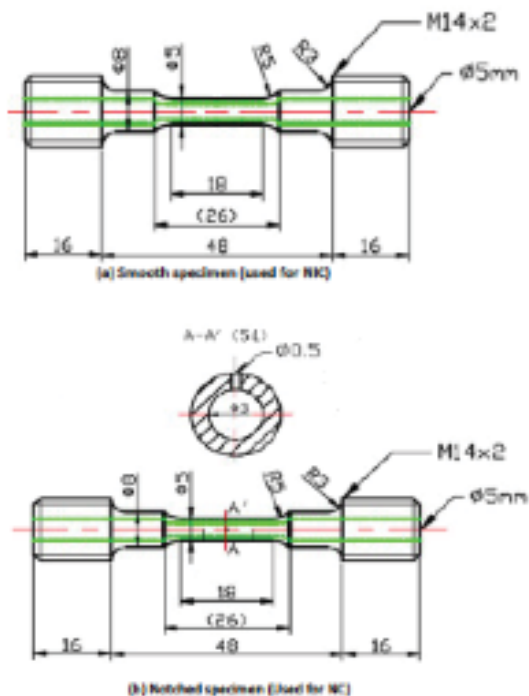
Geometry of specimen used (Dimensions are in mm)
